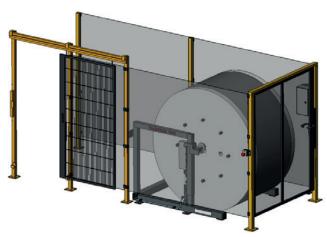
TROMTRAK 1600 incl. saftey fence with wing and sliding doors as access to the drum loading and cable loading between unwinder and rewinder.
